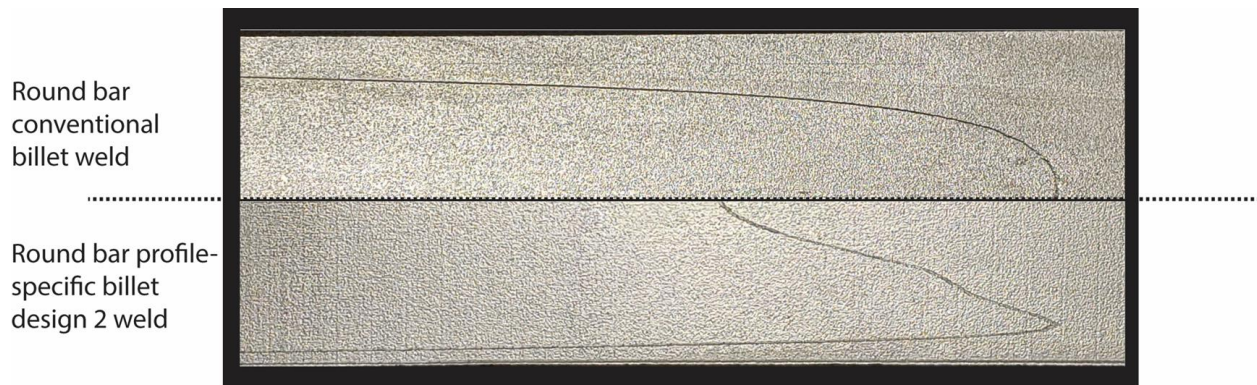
Longitudinal cross section of the conventional billet and profile-specific billet design 2 welds for the base-case round bar profile produced experimentally.
